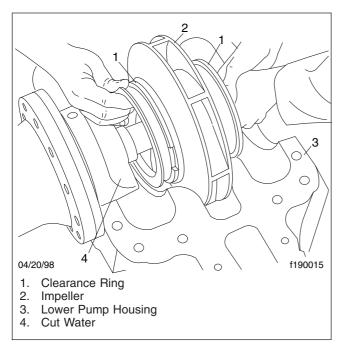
, Lifting the Impeller Assembly from the Lower Pump Housing
